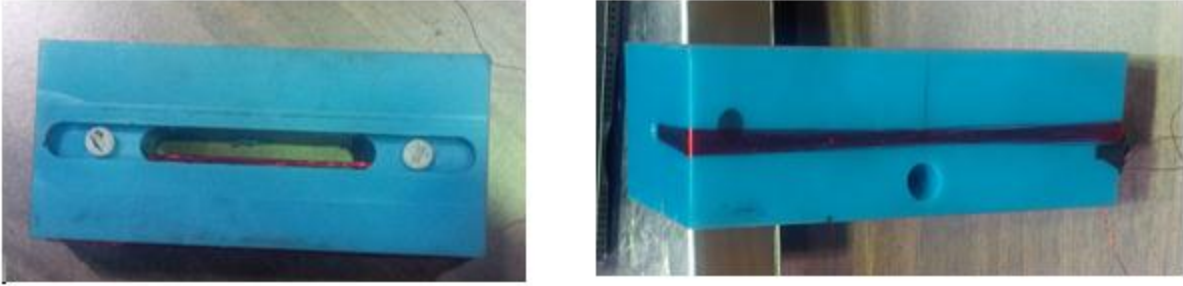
Blue jig with a coil of 50 turns, dimension 150mm X 30mm
